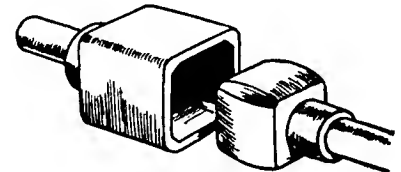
The simplest possible combined universal and sliding joint, still used on the Lanchester car
